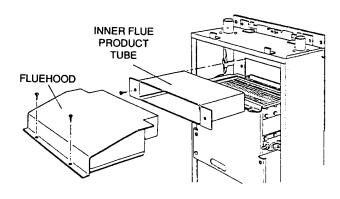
ASSEMBLING INNER FLUE PRODUCT TUBE AND FLUEHOOD
